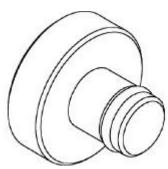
Crankshaft Damper Removal Insert 8513A Courtesy of CHRYSLER LLC
